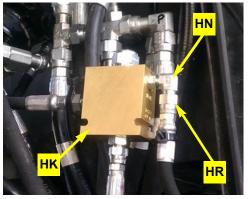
Load sense hose (to steering block) installed at load sense valve
